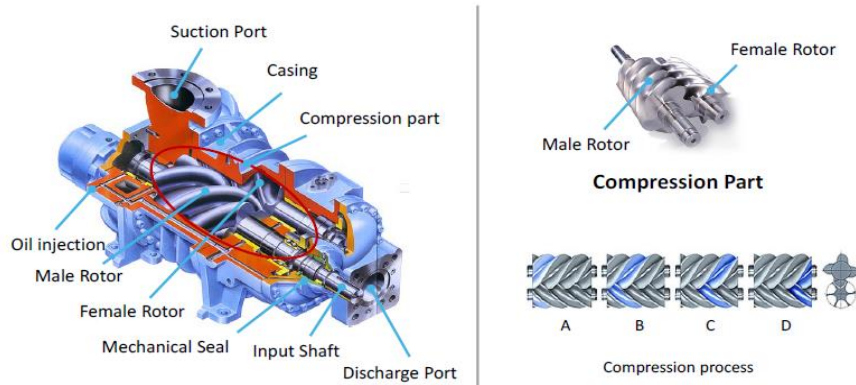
Rotary-screw (twin-screw) compressor (a) Cut-away view (b) theory of operation
